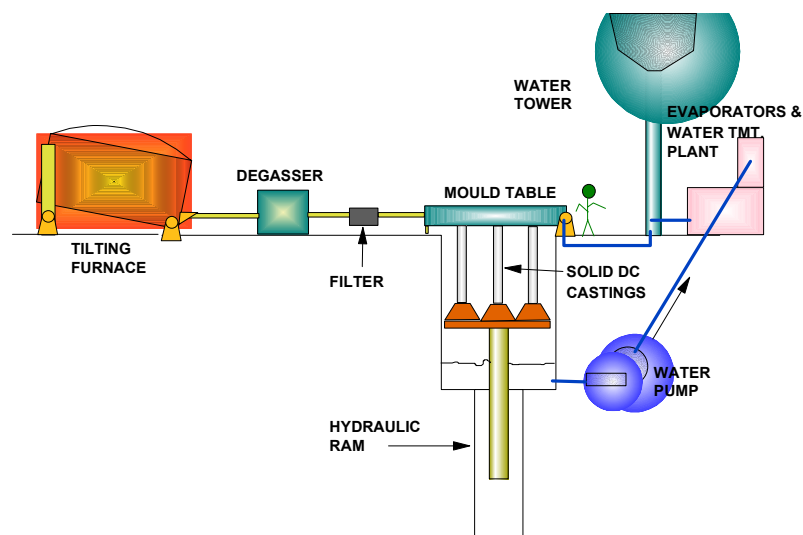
Basic layout of a typical vertical direct chill casting installation.
